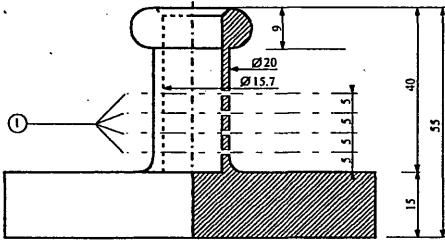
Hollow bronze cylinder, closed at one end; Plan and cut dimensions in mm
